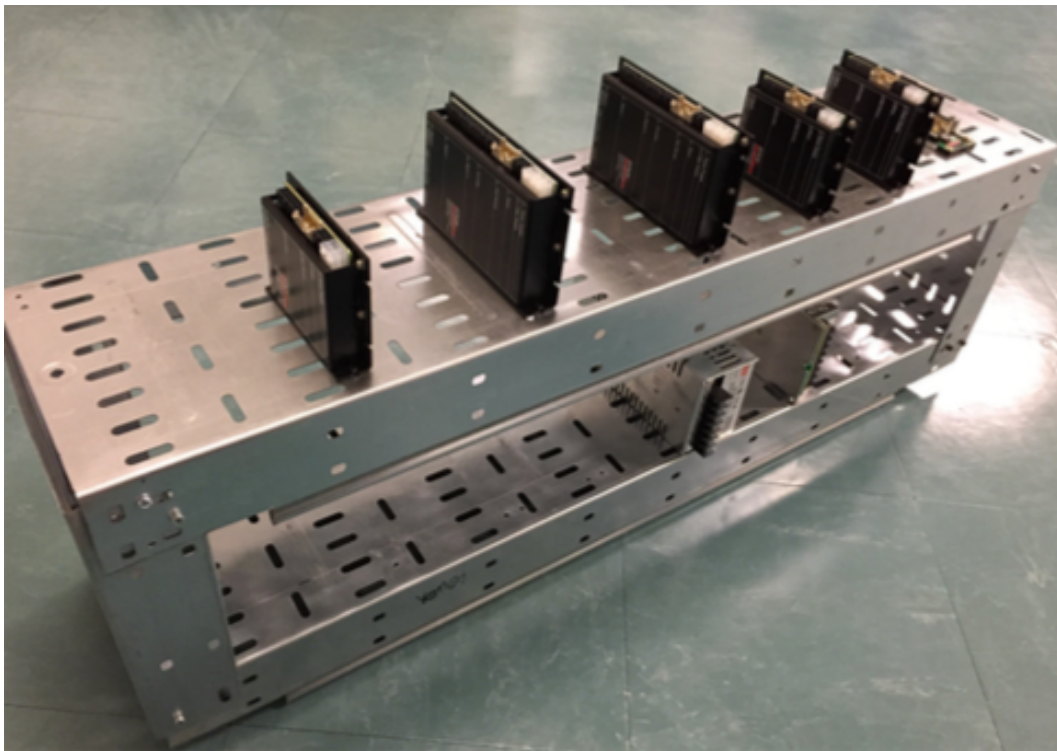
Rack assembly under construction. Controller are placed on the top shelf and power supply on the lower part.
